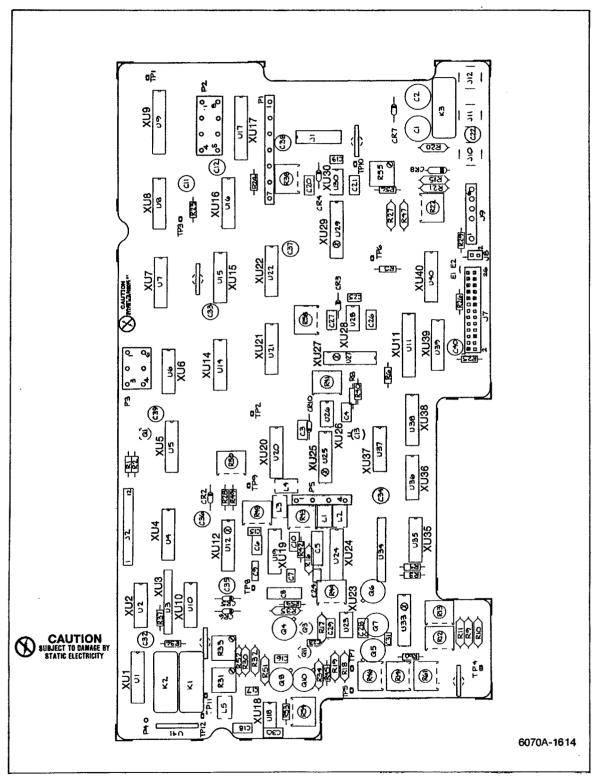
A4A10 Modulator Distribution PCB Assembly
